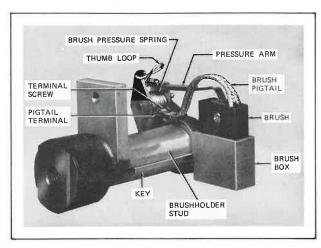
BRUSHHOLDER ASSEMBLY.
